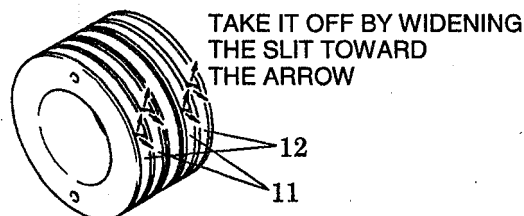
Remove wear ring (11) and dust ring (12)
